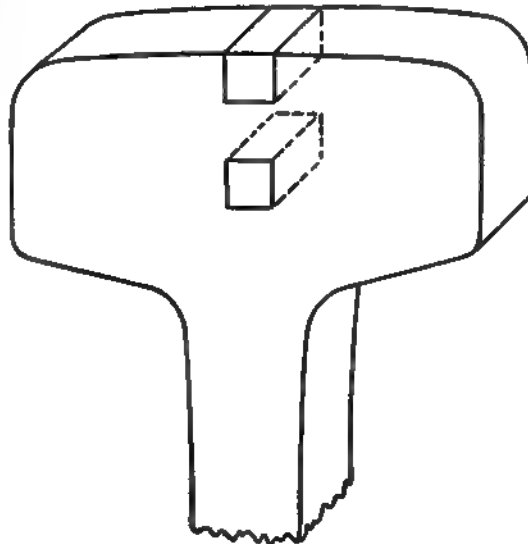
Pieces for Microscopic Views shown in Figs. 316 to 321.
